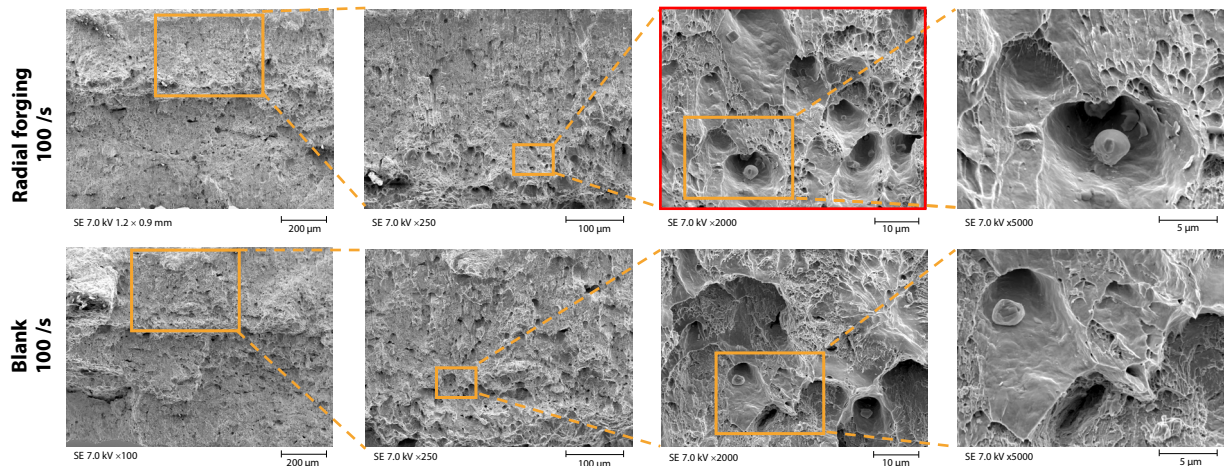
Secondary Electron Magnified Image of Fracture Surface after High-Speed Tensile Test (100 /s)
